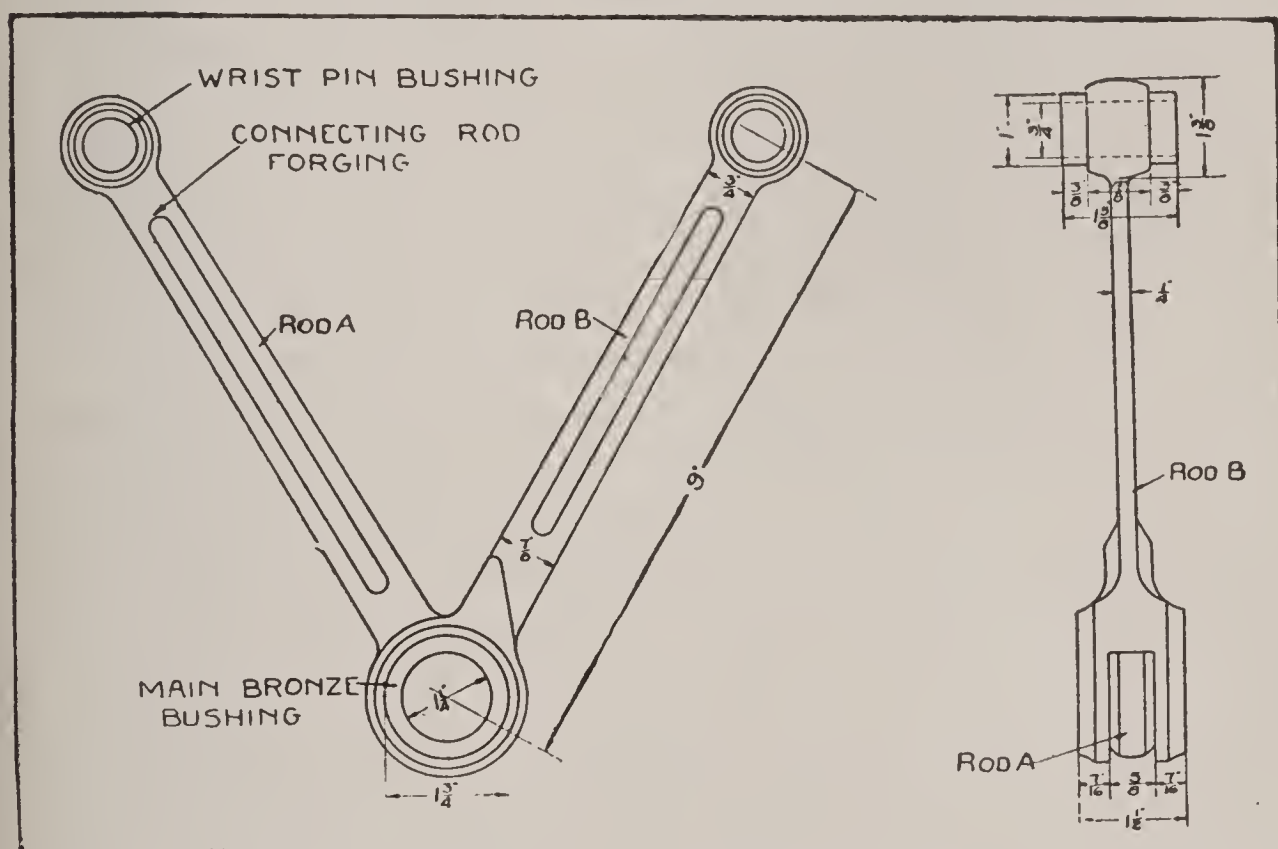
Usual Arrangement of Connecting Rods of Twin Cylinder Motorcycle Power Plant. This Working Drawing Gives the Principal Dimensions of an Assembly Used on a Nine Horse-power Motor.
